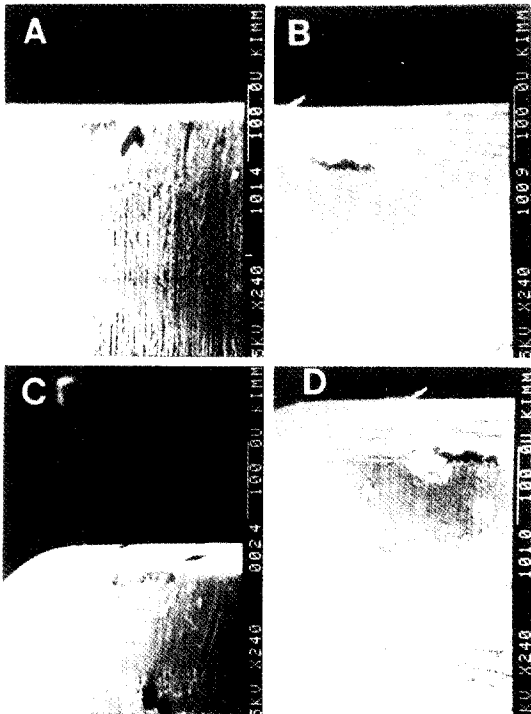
SEM micrographs of the cutting edge of the tool worn during cutting grey cast iron; (a) GA, (b) HA, (c) HB and (d) HC tool tested on NC lathe, cutting speed: 450 m/min, feed: 0.1 mm/rev., depth of cut: 1.5 mm.
